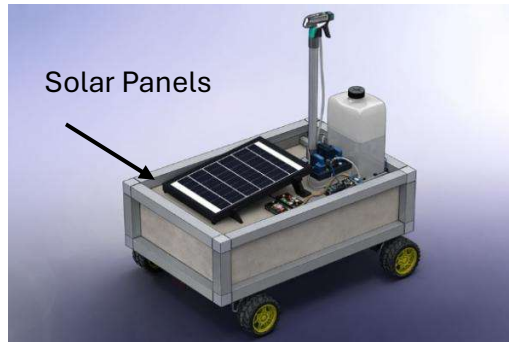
ISOMETRIC VIEW OF THE 3D CAD MODEL OF THE SPRAYER CAR PROTOTYPE
